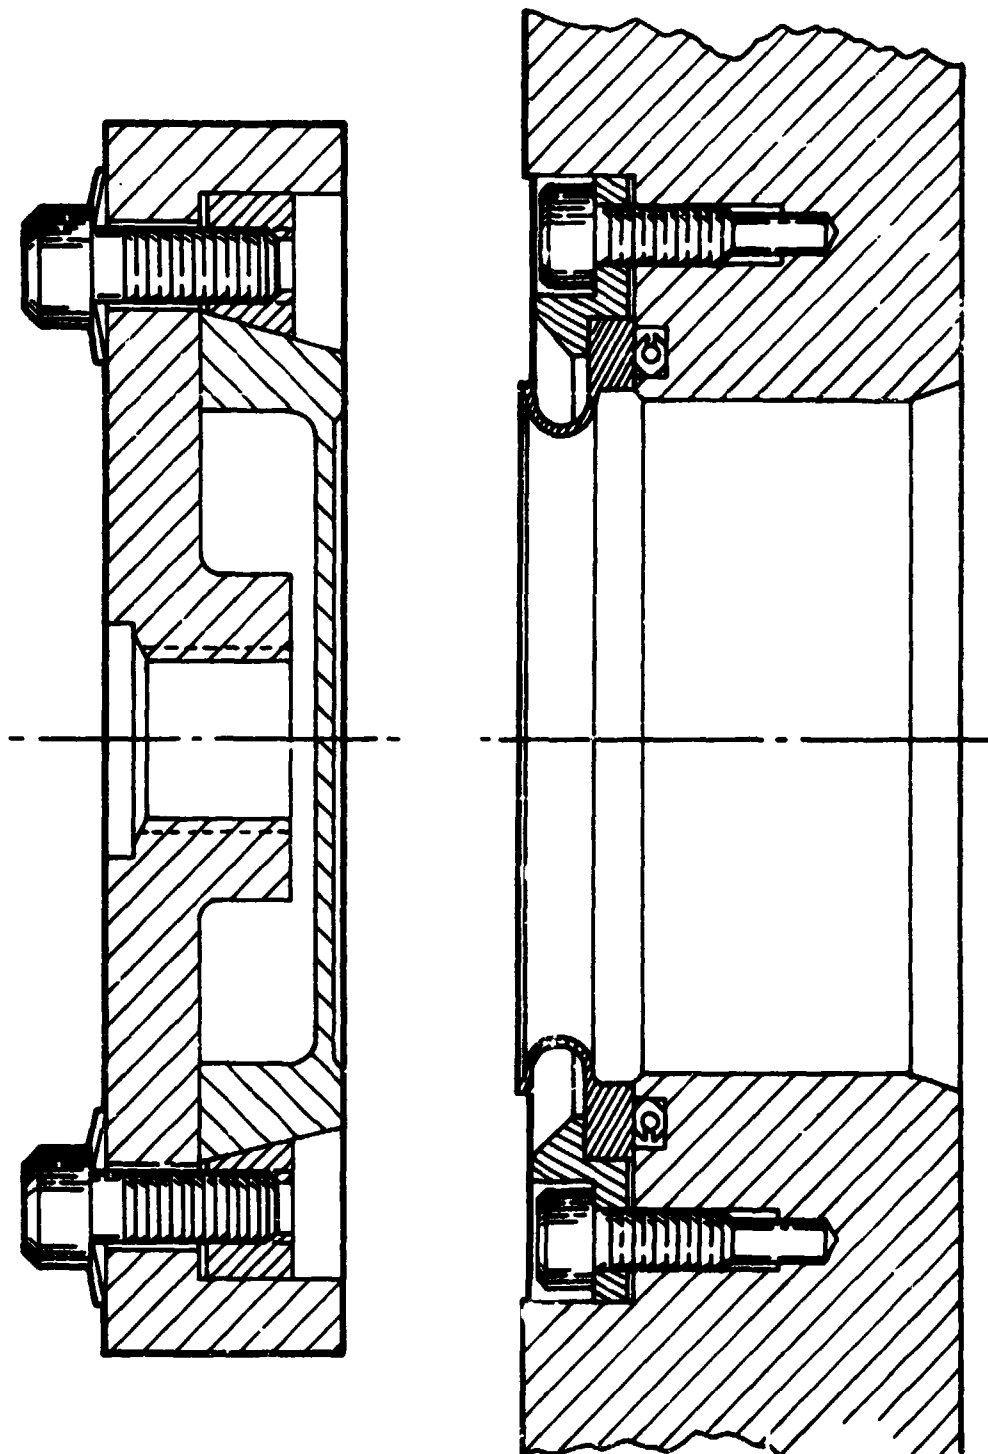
Gold Plated Lip Seat, Drawing No. L4312
